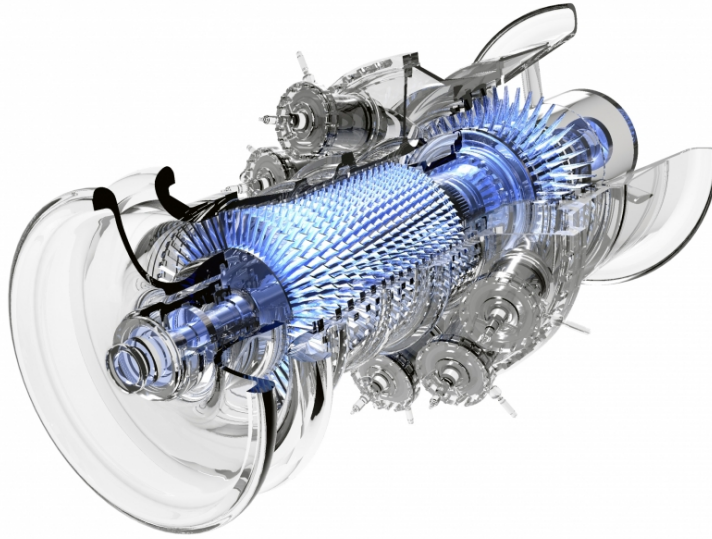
Detailed view of GE 7E.03 gas turbine, illustrating can-type combustion chambers.
